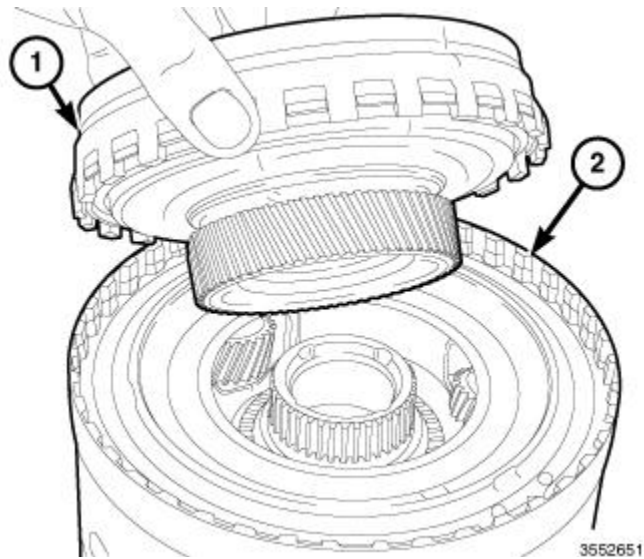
P2 Annulus/P3 Sun Gear & Drum Assembly
